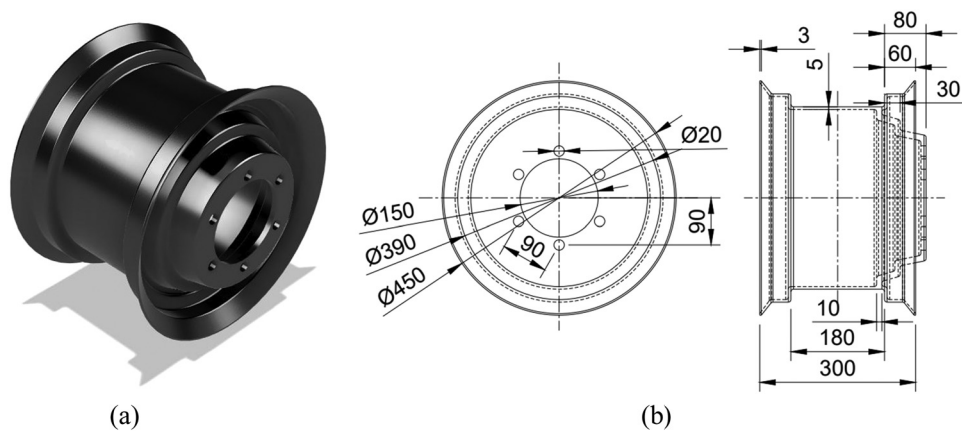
(a) Rim wheel design in 3D and (b) rim wheel design in 2D. All sizes are in mm.
